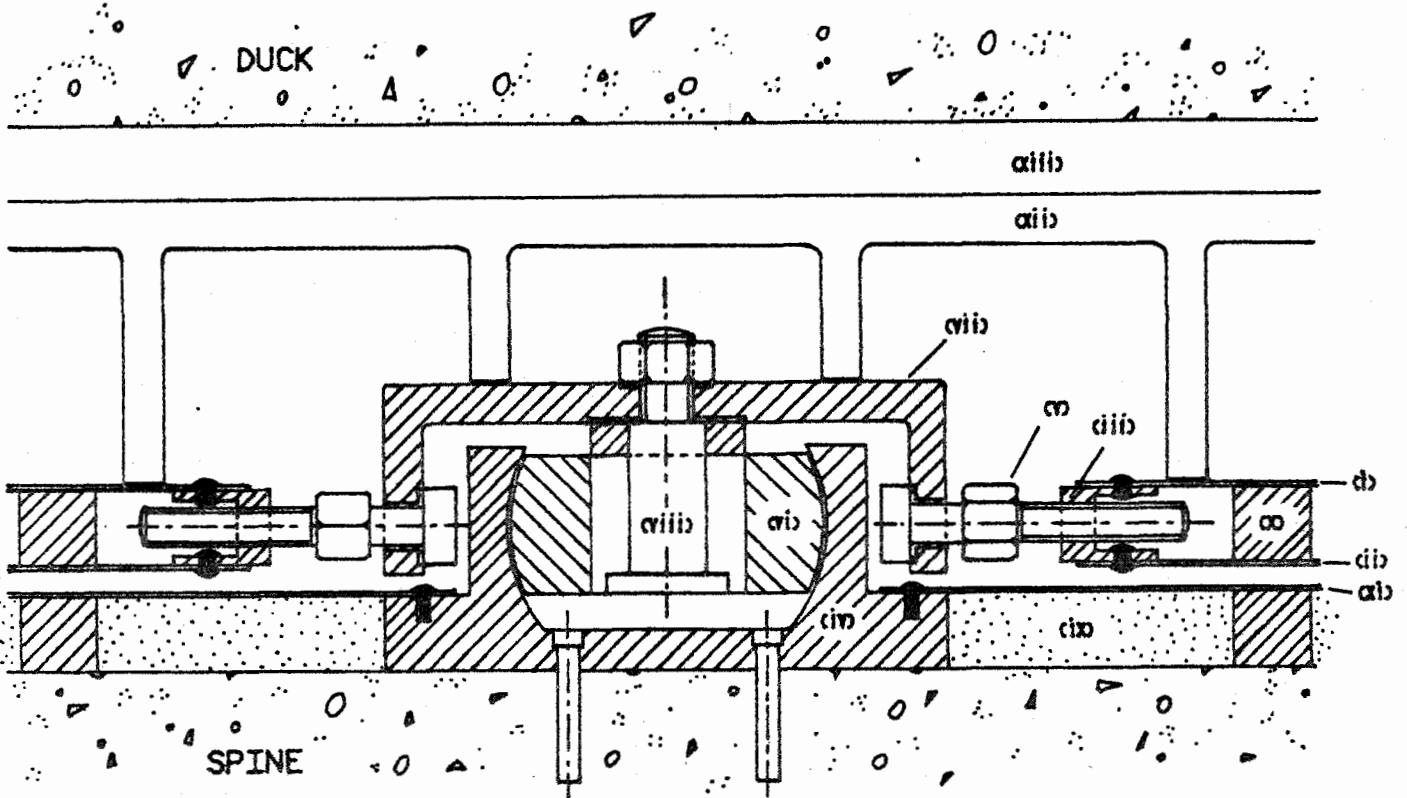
MAGNETIC SQUEEZE-FILM BEARING AXIAL ALIGNMENT DESIGN
